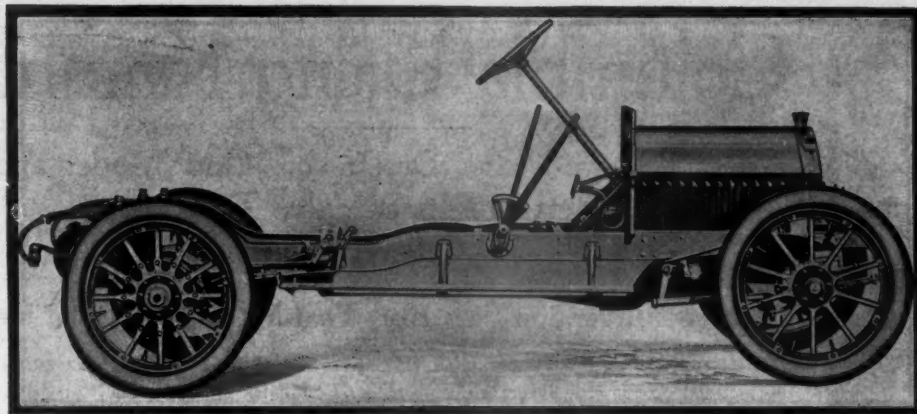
SIDE VIEW STEARNS-KNIGHT 1912 CHASSIS
